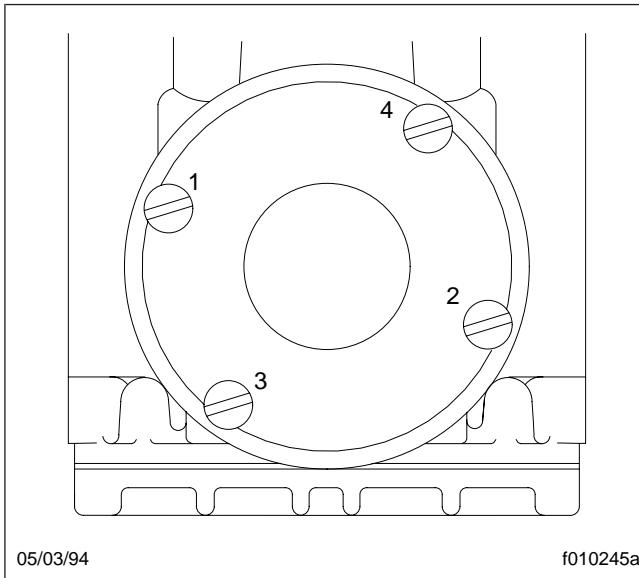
, Rear Bearing Cover Plate Capscrew Tightening Sequence
